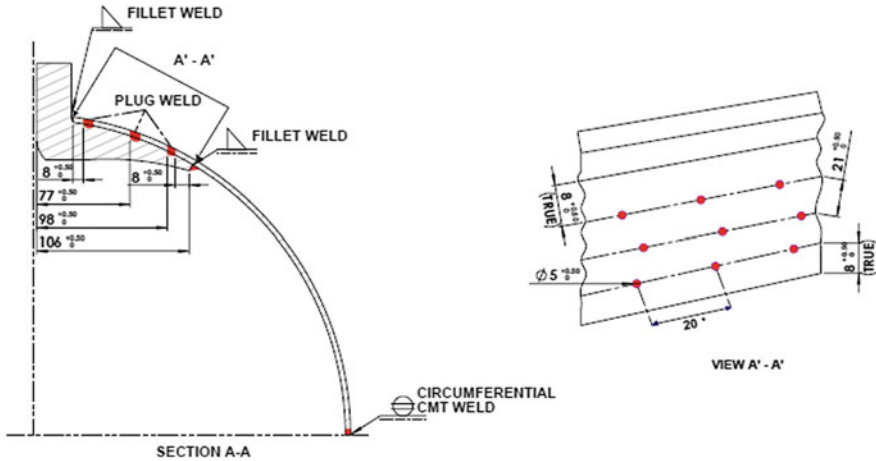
Representation of plug, fillet and CMT welding locations in the liner
